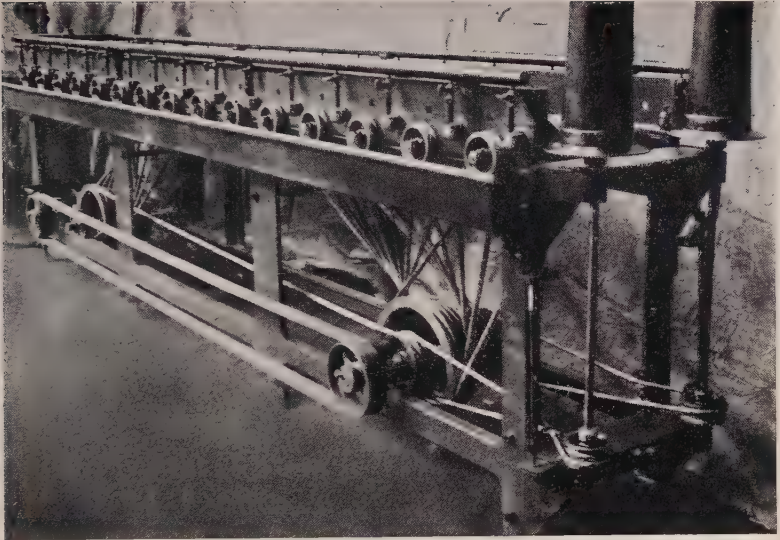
Fine-Wire-Drawing Machine as Employed about 1900.
